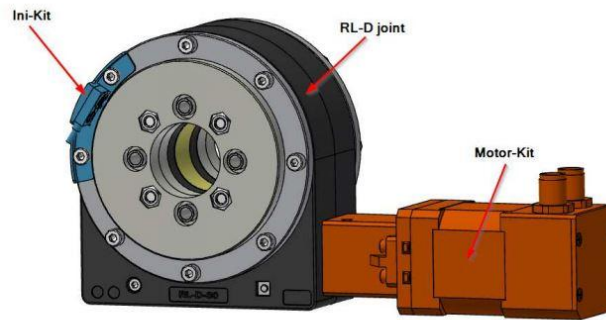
The overall look of the robolink® -D joints with stepper motor and initiator sensor [26].
